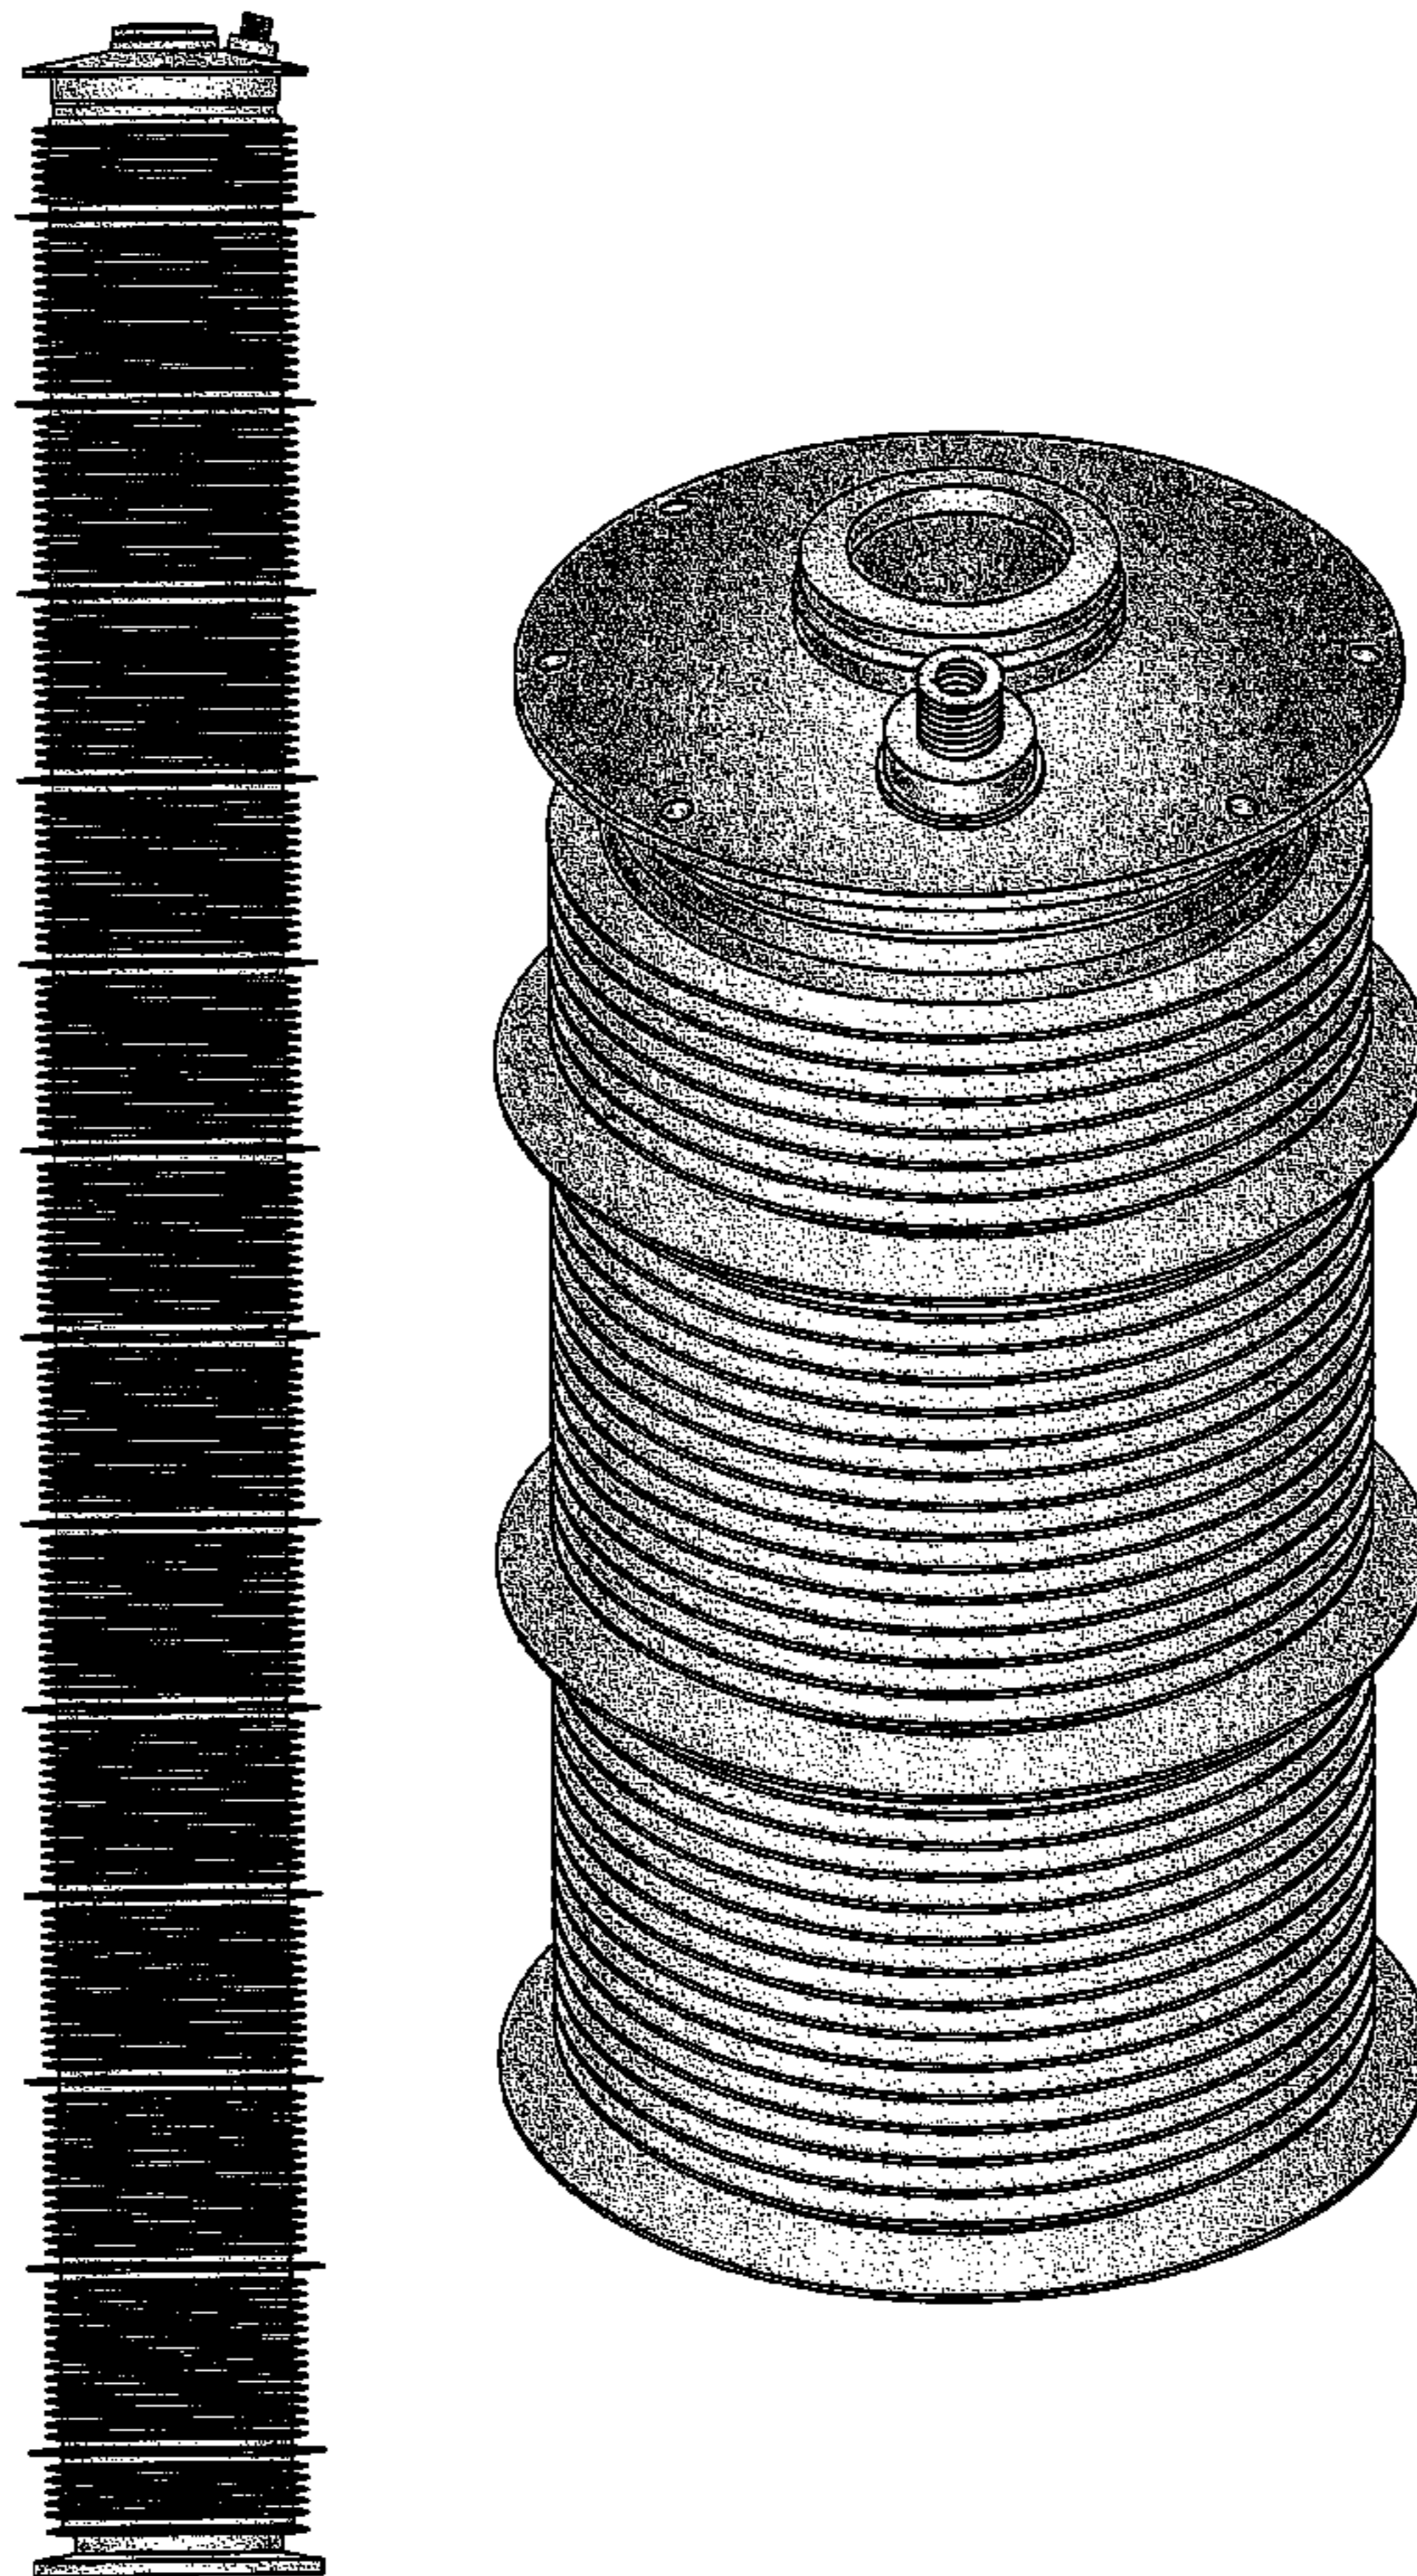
is a front elevational view of an outer casing for high-voltage apparatus showing my new design; the rear elevational view being a mirror image thereof.
